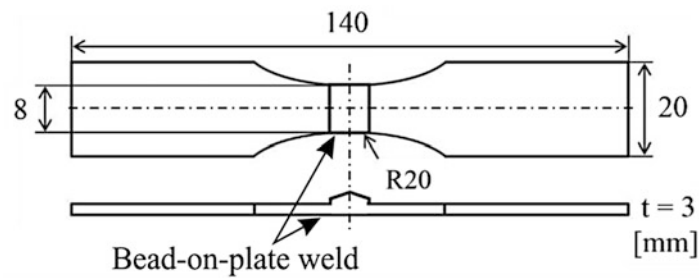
Schematic illustration of specimen with bead-on-plate weld
